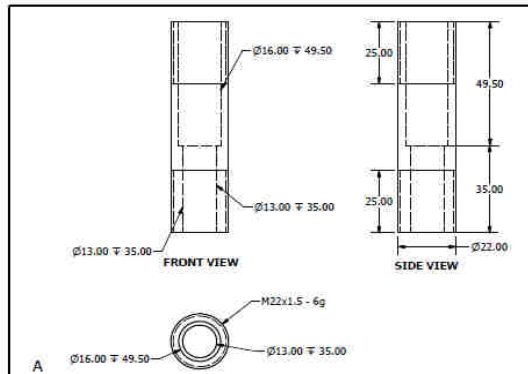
Sectional views of the mixing chamber (all dimensions are in millimeters)
